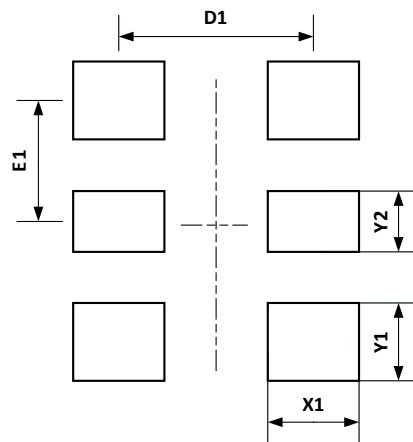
AS5002 (5032 and 3225 package) PCB Land Pattern
